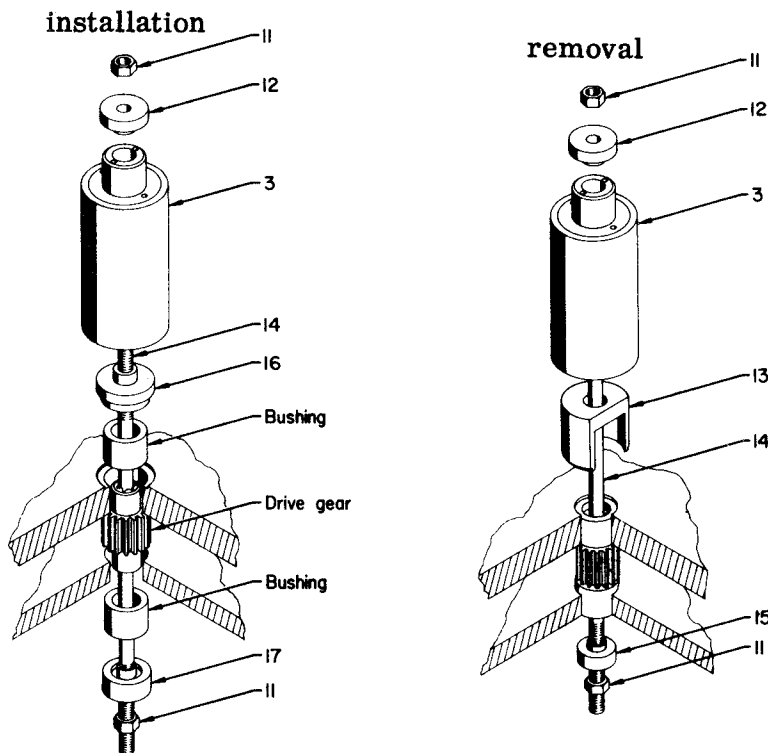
Bushing Removal Tool (Part Number 92091200)
